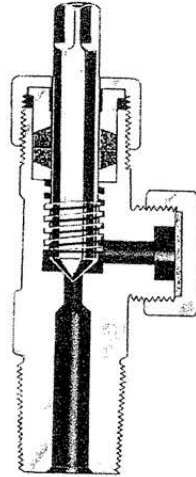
One Typical Style of a Cylinder Valve (Other designs may also be in use)
